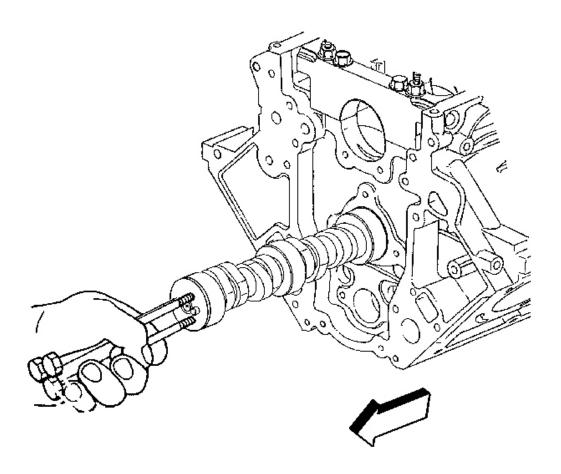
View Of Bolts installed In Camshaft Front Bolt Holes Courtesy of GENERAL MOTORS CORP.
